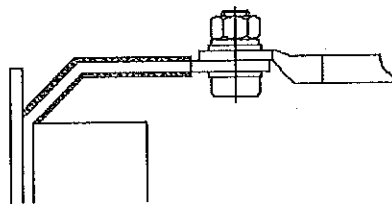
Drawing of bolted electrical connection; beginning of winding at the top of the coil
